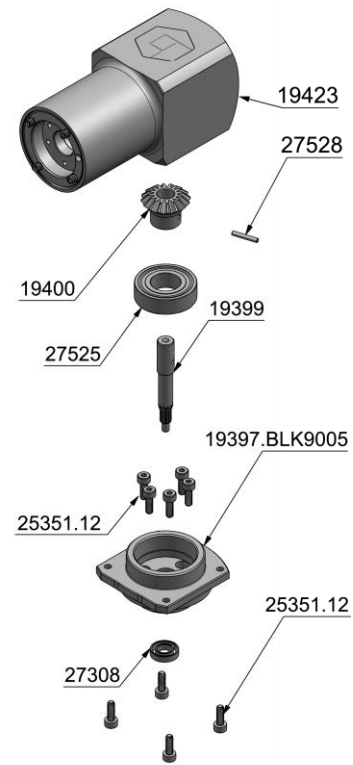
Inserting Ball Race SKF 618/8
